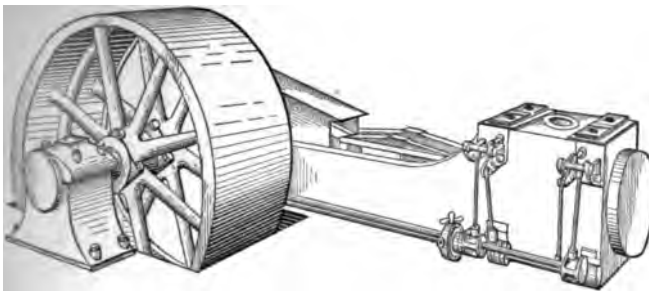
Medium-Speed Engine — Shaft Governor — Positive Cut-off.
